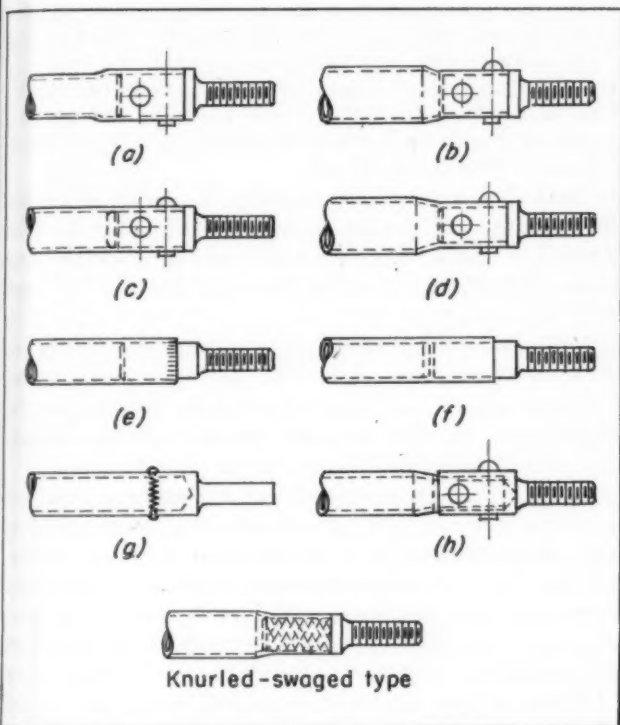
Above—Methods of assembly currently used for push-pull and torque rods
